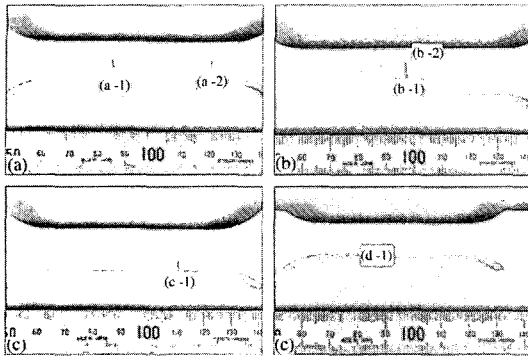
The morphology of surface cracks after magnetic particle inspection of FCAW deposits
